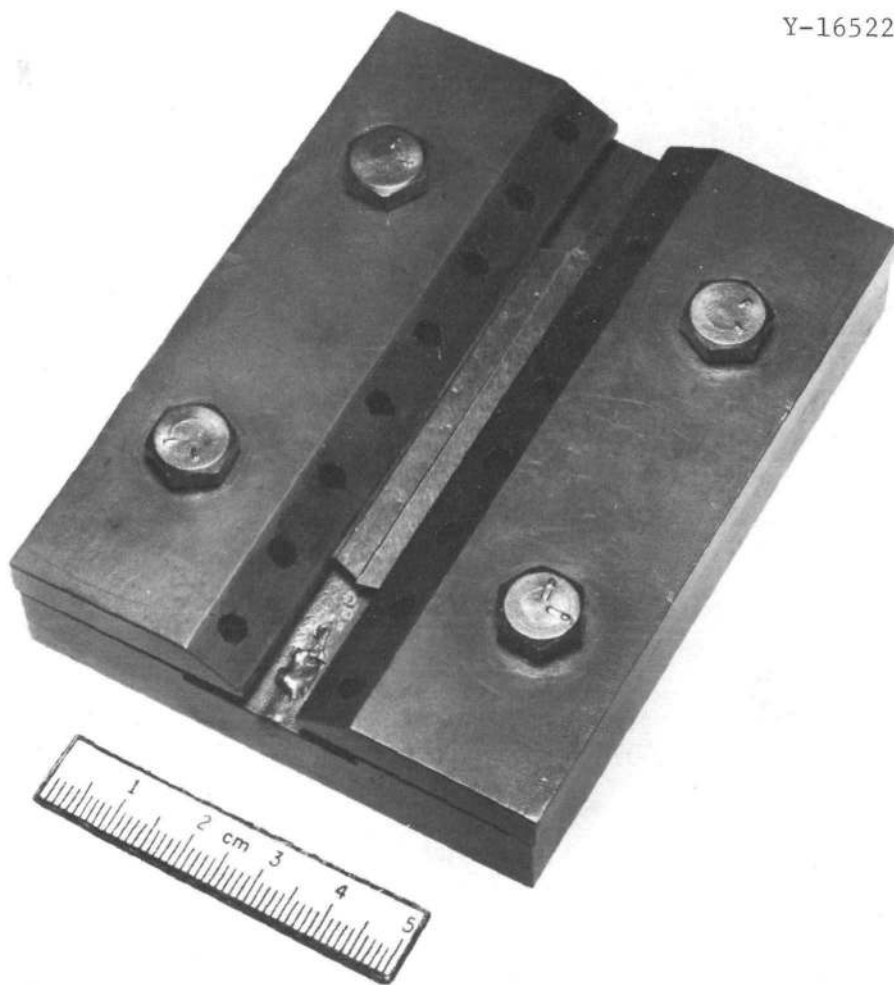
Welding Fixture Used to Make Autogenous Bead-On-Plate and Butt Welds.
